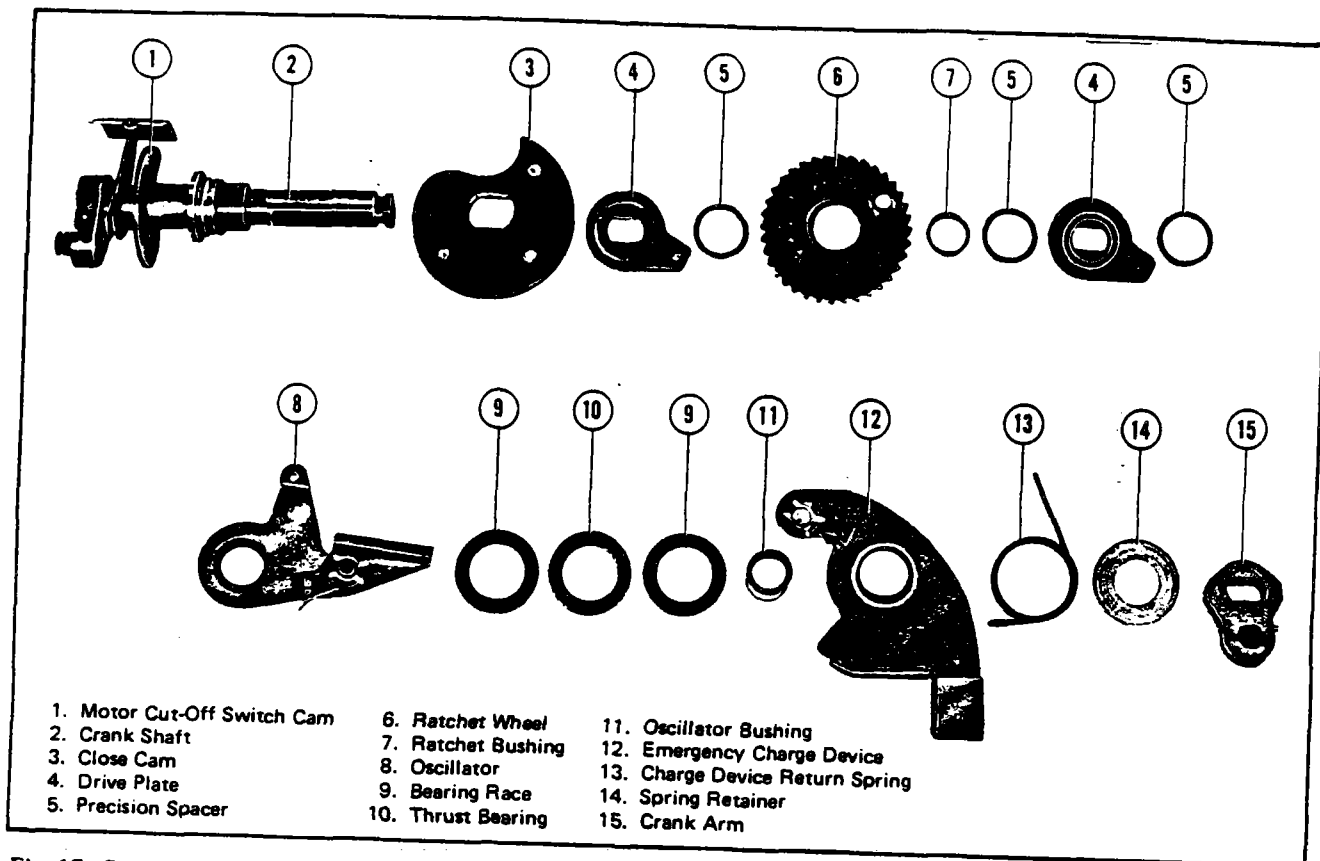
Crank Shaft Assembly of Power-Operated Mechanism (385304)
